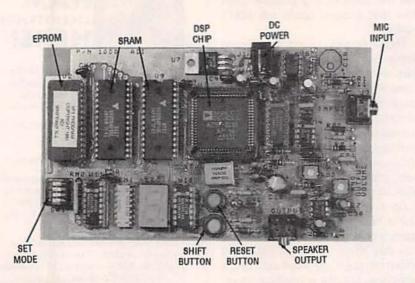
THE VFX PROTOTYPE. Carefully check the board for solder splashes and bridging before applying power.
